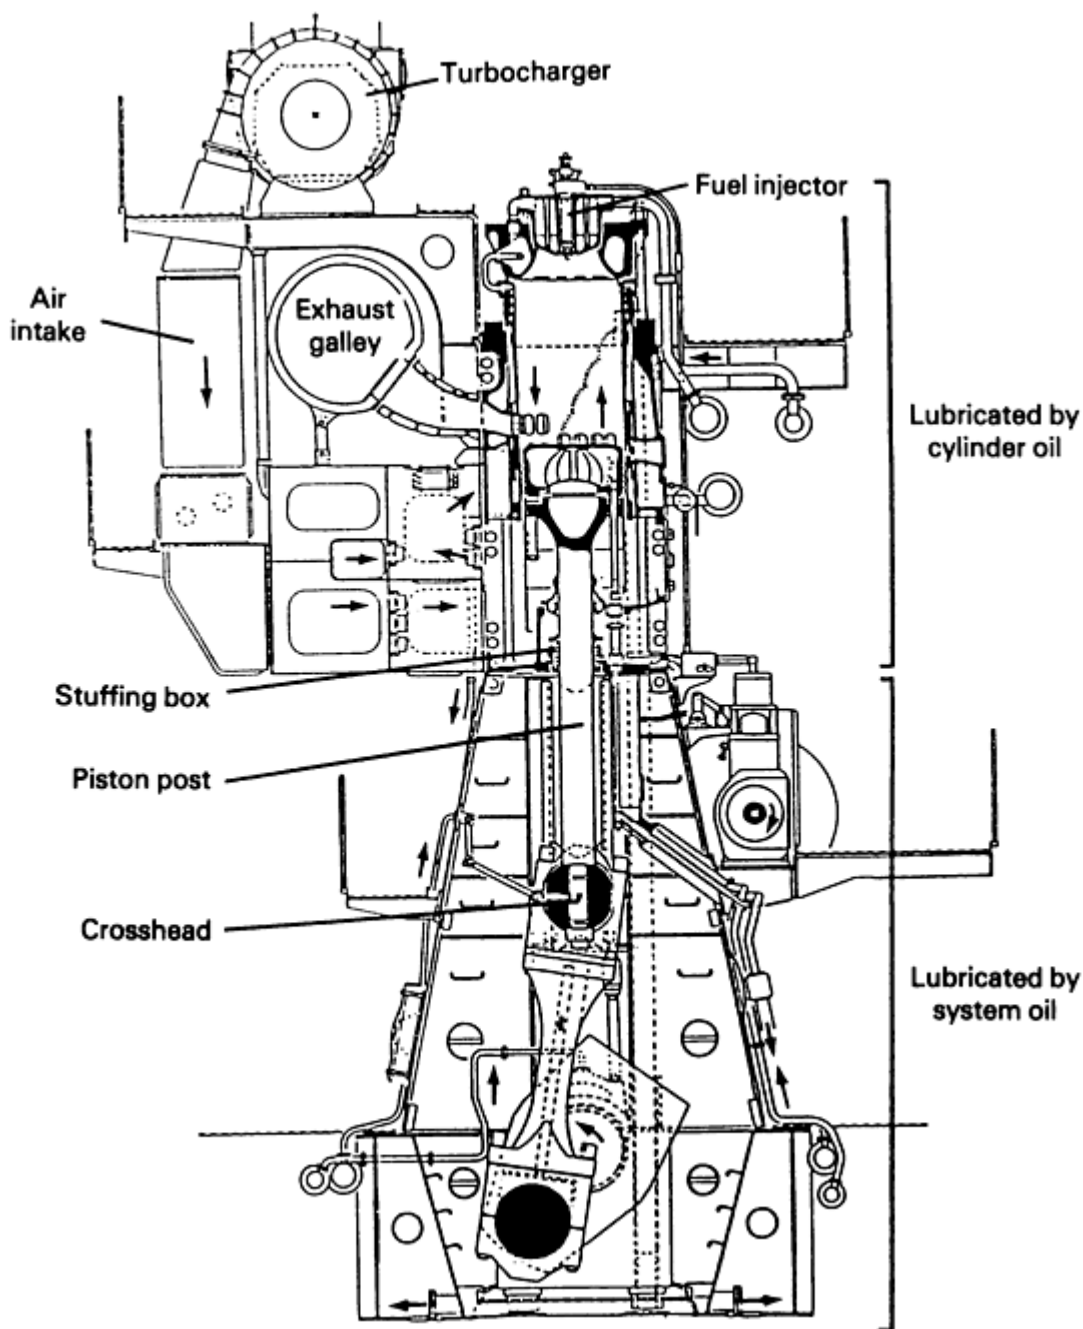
Cross section of crosshead marine diesel engine. Source: Ref 16
